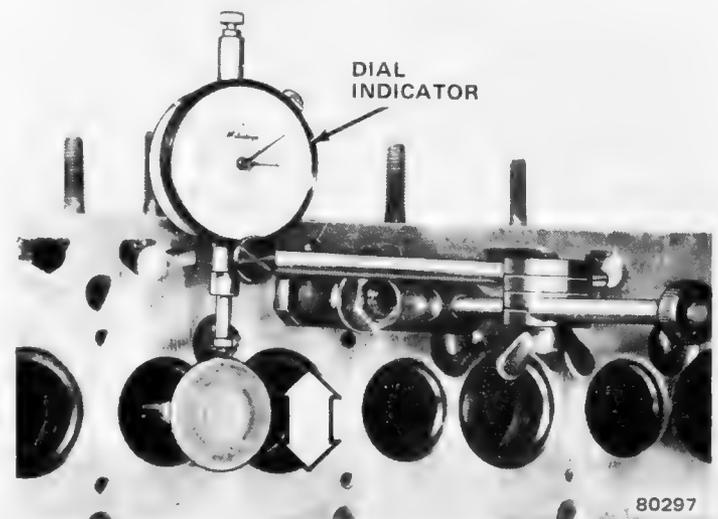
B-25 Checking Valve Stem Clearance with Dial Indicator
